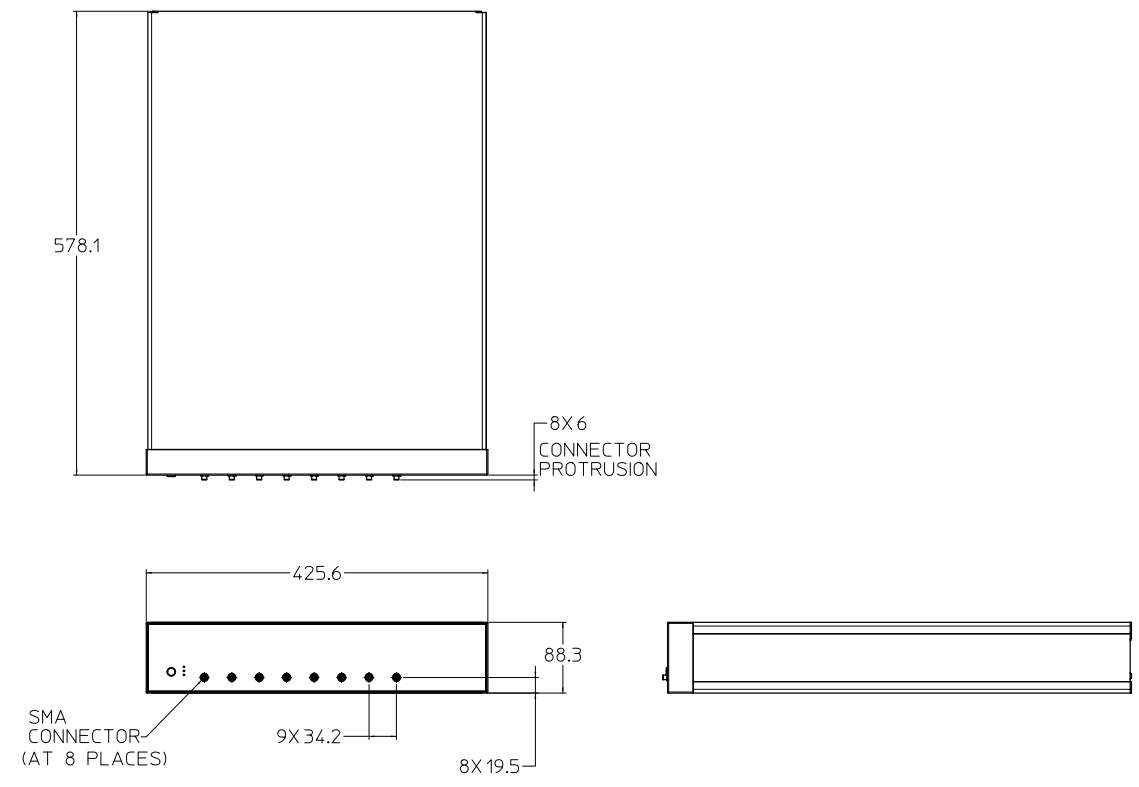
Mechanical dimensions of the J7204A/B with SMA connector
